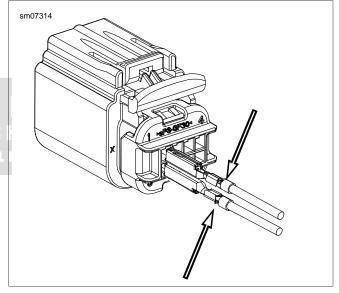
Socket Terminal Orientation: Crimp Open Side
